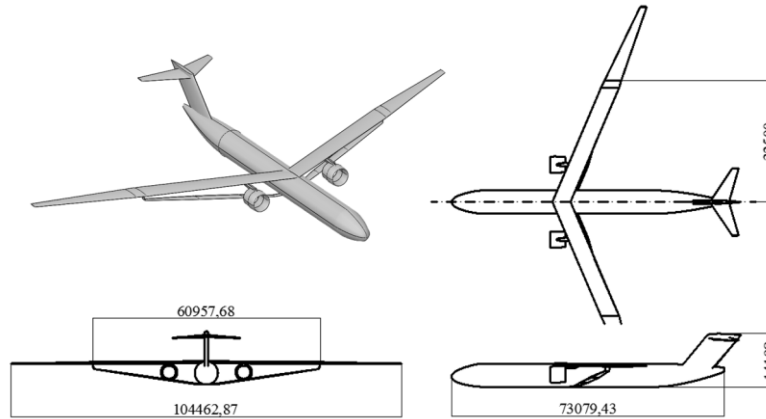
Three-view dimensions of LR-SBW aircraft.
